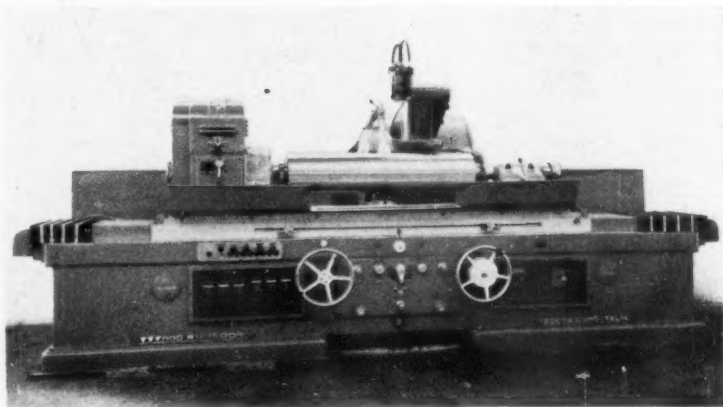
Zocca type RU1500/6 hydraulic cylindrical grinder of 12-in. centre height, which accommodates 59 in. between centres
